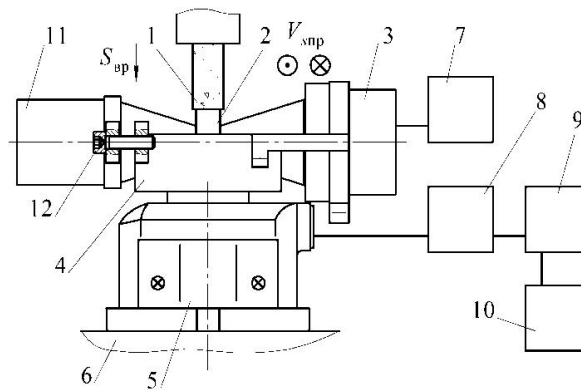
Drawing of the unit for research of the grinding process with applying USV on the workpiece: 1 – grinding wheel; 2 – workpiece; 3 – ultrasonic transmitter; 4 – device for workpiece positioning; 5 – dynamometer UDM-100; 6 – machine table; 7 – ultrasonic generator (USG-641A); 8 – TDA amplifier; 9 – ADC 16/16 – SIGMA/USB; 10 – PC; 11 – reflector; 12 – screws
